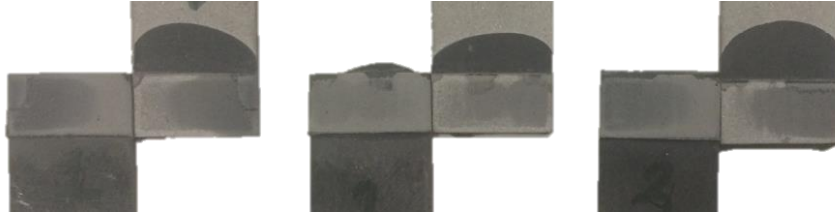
Failure modes of CFRP (2.1 mm)/HSS (2 mm) 12.5 mm overlap SLJs tested specimens
